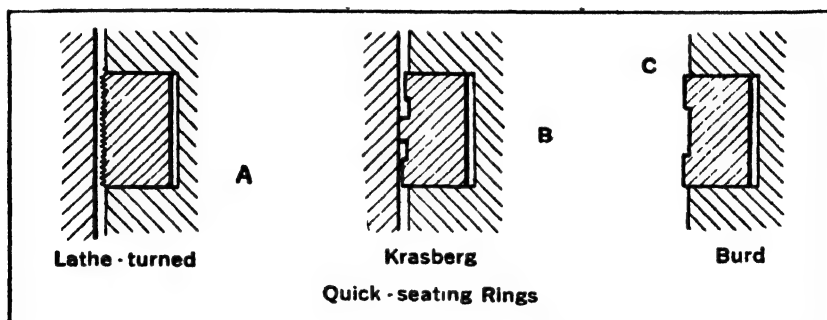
Diagram Showing Method of Machining Surface of Piston Rings to Insure Quick Seating of New Rings.
